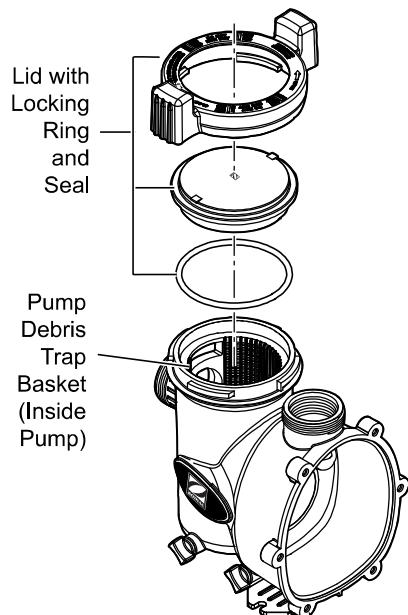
EXPLODED VIEW OF LID ASSEMBLY
